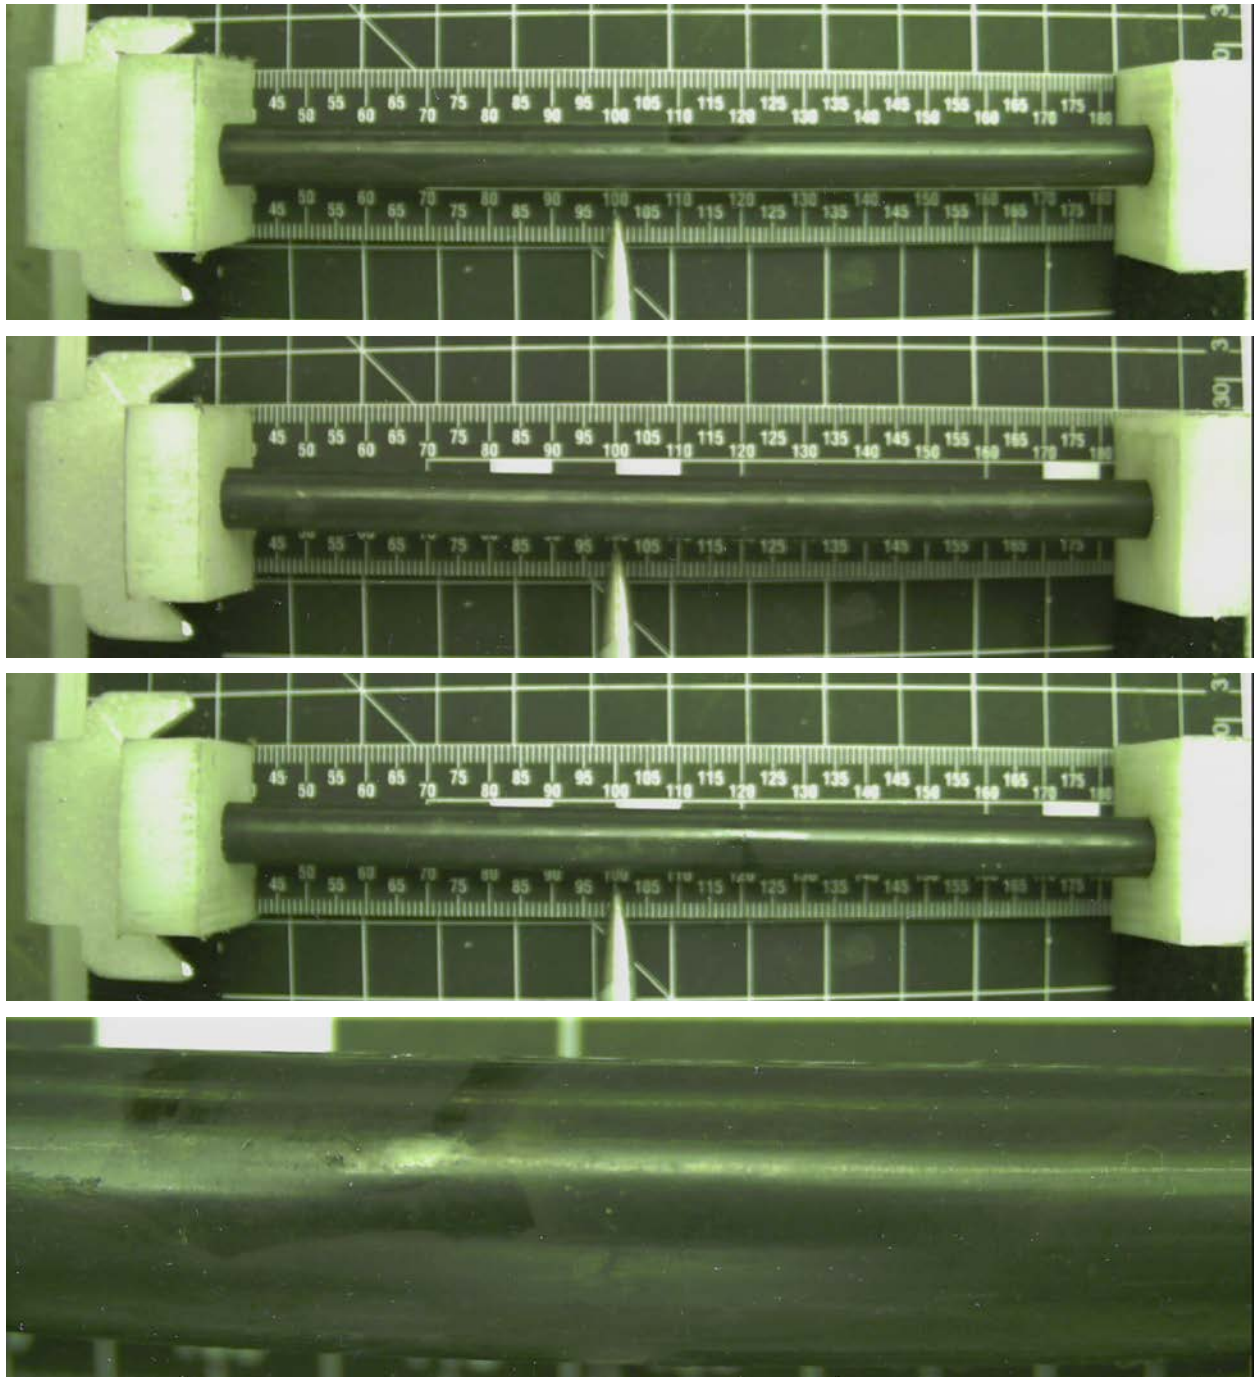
Post-Tensile Image Bottom Fracture for UL-3-15
